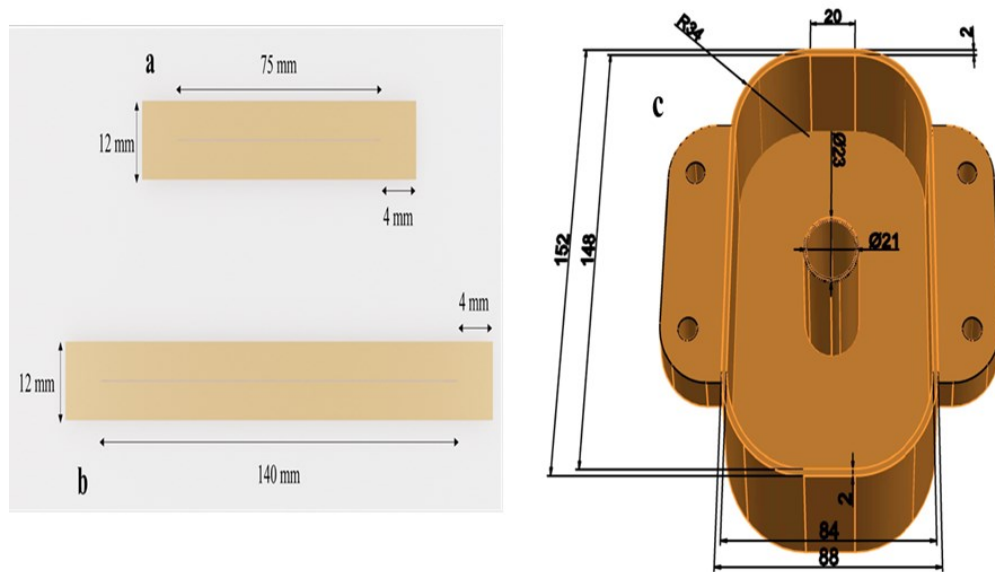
Schematic of slitted tapes for smaller and larger rings. (a) inner smaller rings dimensions. (b) outer larger rings dimensions. (c) the proposed holder design with labelled dimensions.
